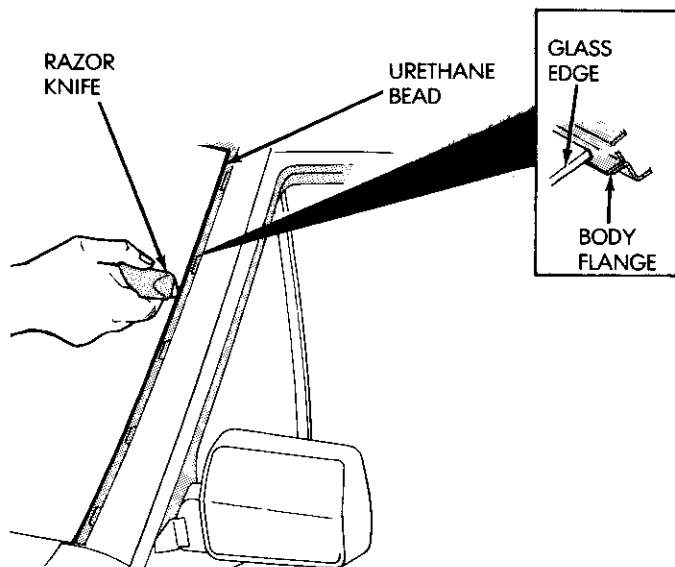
Cutting Adhesive Away From Edge Of Windshield Glass
